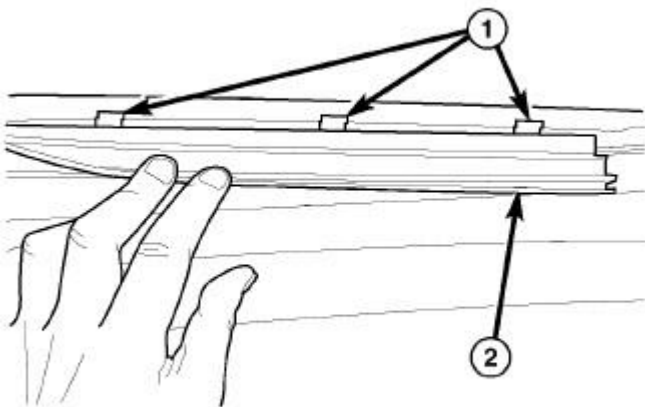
Removing/Installing Mechanism Covers At Glass Panel
